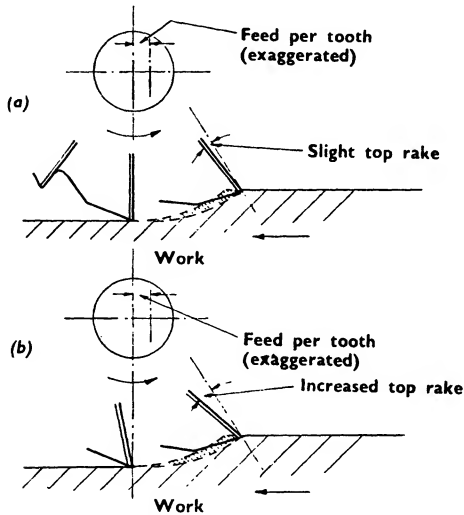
DIAGRAM SHOWING THE CUTTING ACTION OF A MILLING CUTTER
